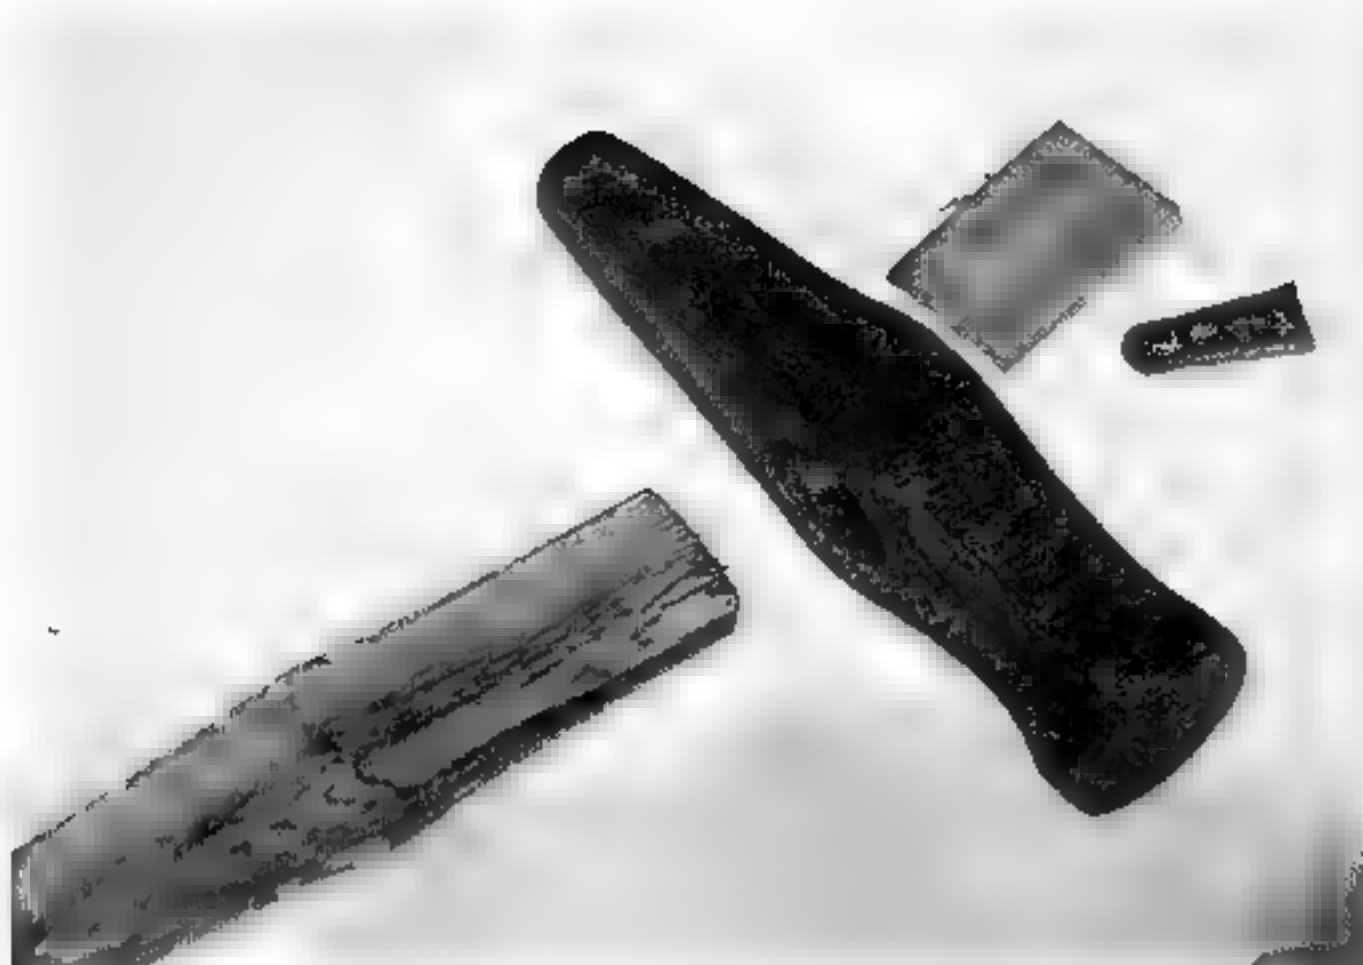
The items necessary to rehandle a hammer: handle, hammerhead, sand paper, and wedge
